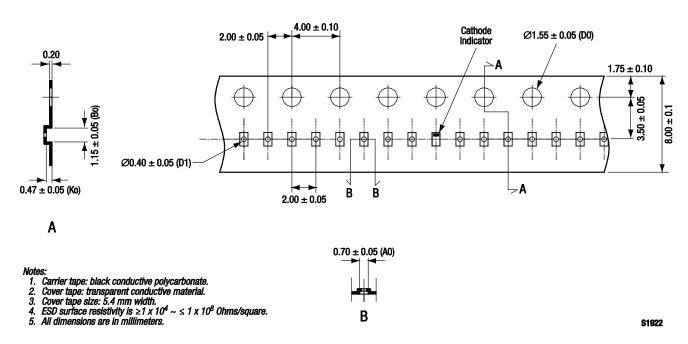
SMV1234-040LF Tape and Reel Dimensions
